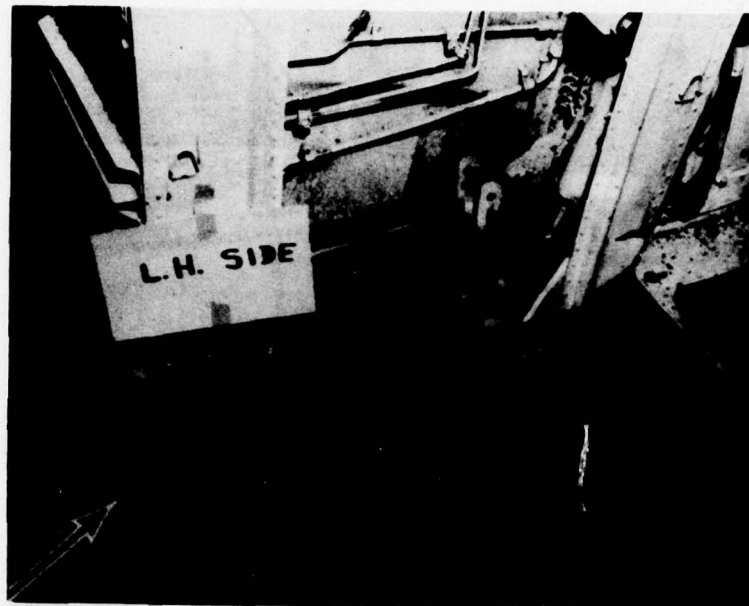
CH-47A Crash Test Damage to Frame 120 and B.L. 18 Beam Due to Impact by Forward Trailer Experiment.
